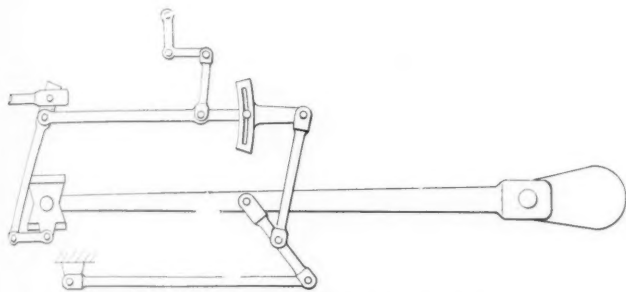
Valve Gear as Applied to Etat 4-4-0 Type
